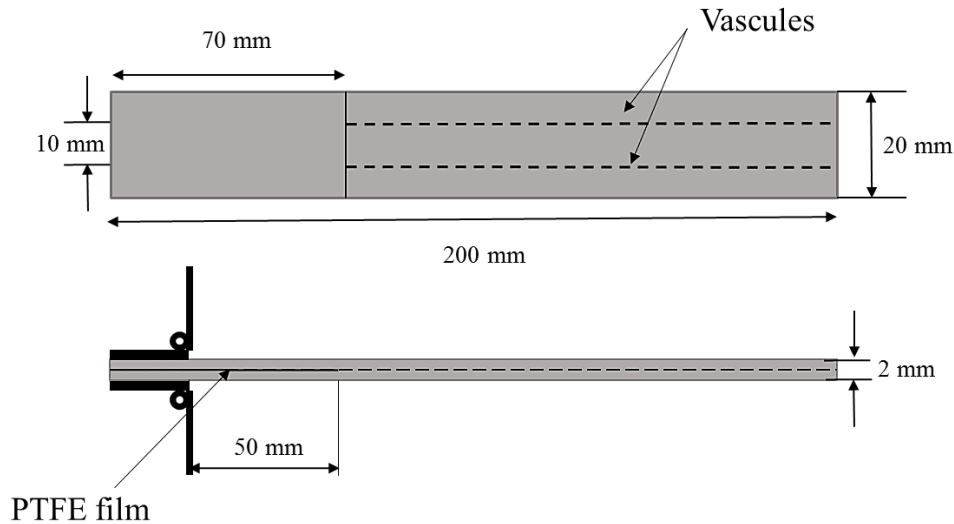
Double Cantilever Beam (DCB) coupon specimen geometry
